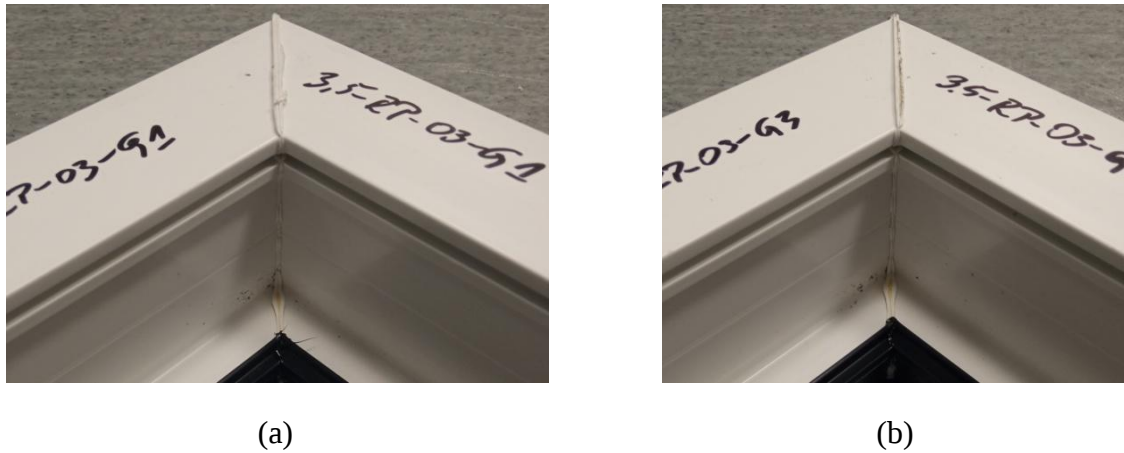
Representative welds from the reconnaissance tests: (a) welded using head 1, (b) welded using head 3 [12]
